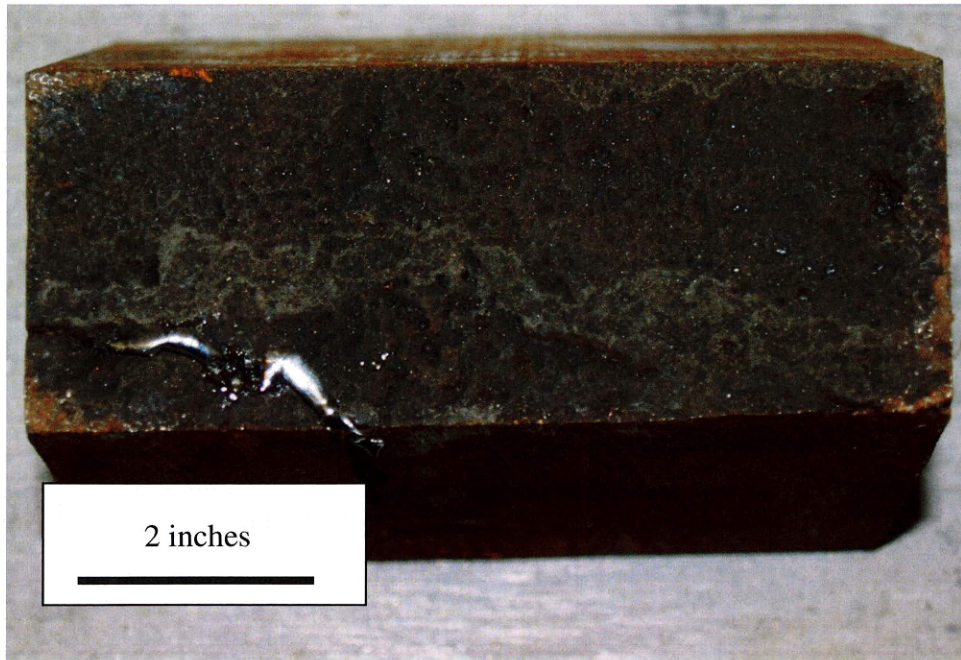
Solder cast in place at surface of boiler valve crack
